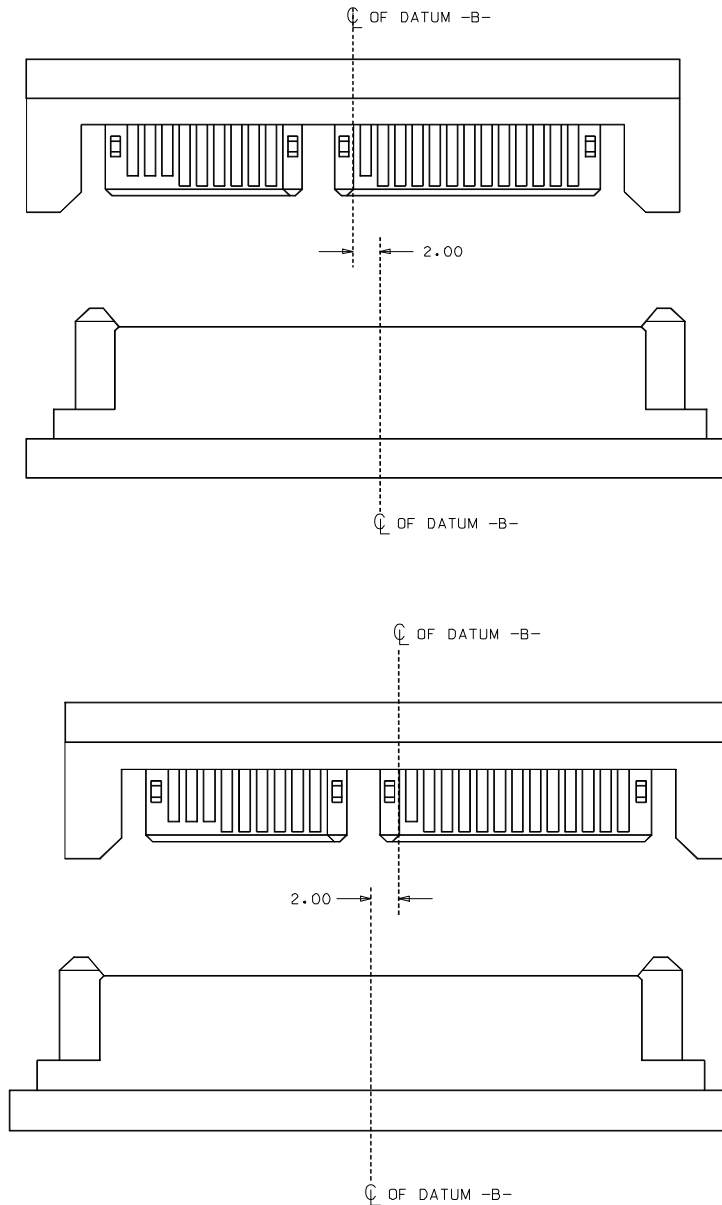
Device Bay Connector Pair Blind-Mate Horizontal Misalignment ± 2.00 mm Tolerance.
